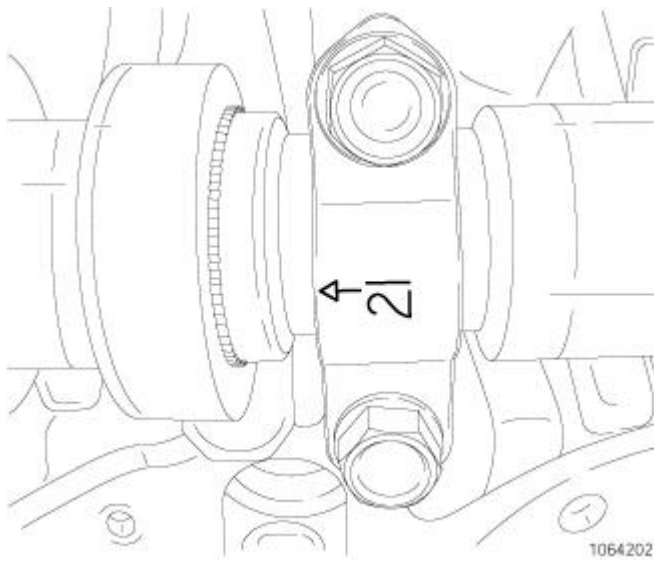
Positioning Camshaft Cap Arrow Toward Front Of Engine
